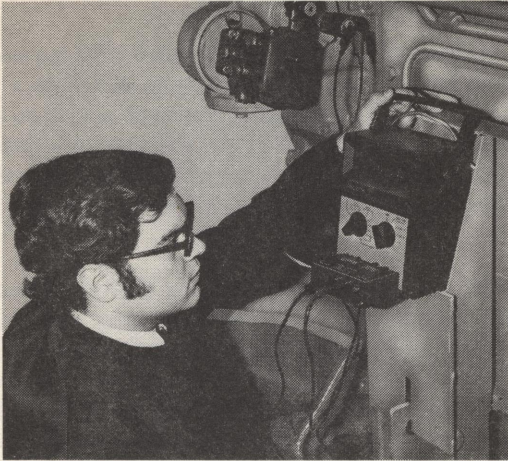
MEASURING ENGINE SPEED AT TACHOMETER DRIVE FITTING ON GOVERNOR DRIVE GEAR BOX.
